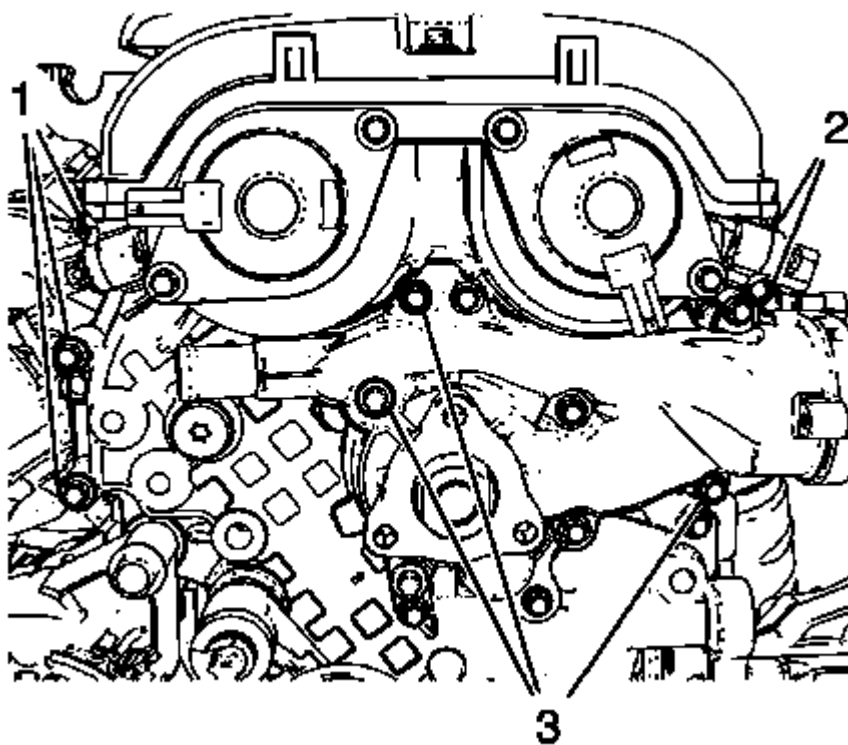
Engine Front Cover Bolts And Water Pump Bolts
